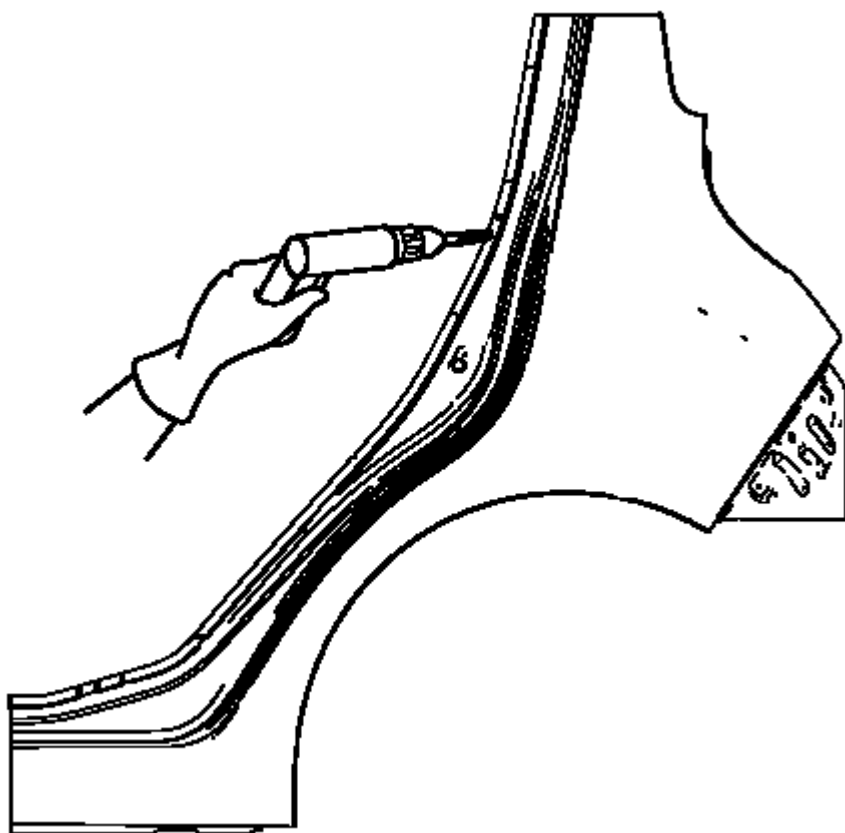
Drilling 8 mm (5/16 in) For Plug Welding Along Edges Of Quarter Outer Panel
